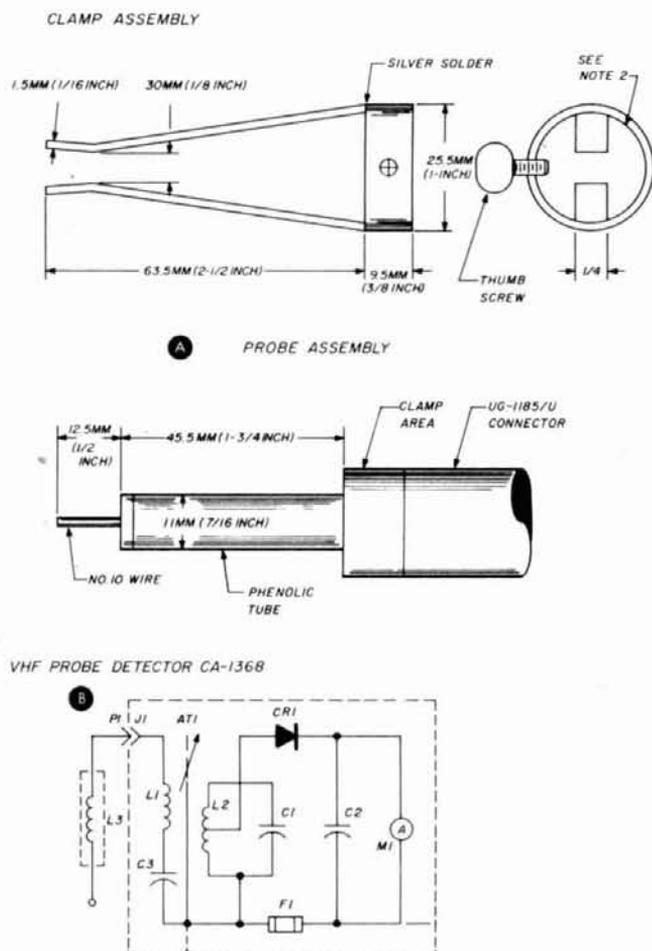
Detailed diagram of a detector assembly which can be used with a homemade fluted line (A). The clamp assembly slides over the probe assembly and is secured with a thumb screw in the clamp area. The schematic diagram shown in (B) is suitable for use with the probe. This detector has the capability, by use of the attenuator, of determining the VSWR on the line. If other means of measuring VSWR are available, the attenuator can be deleted. The tuned-circuit can be changed to measure the desired frequency, acting as a simple rf voltmeter.
